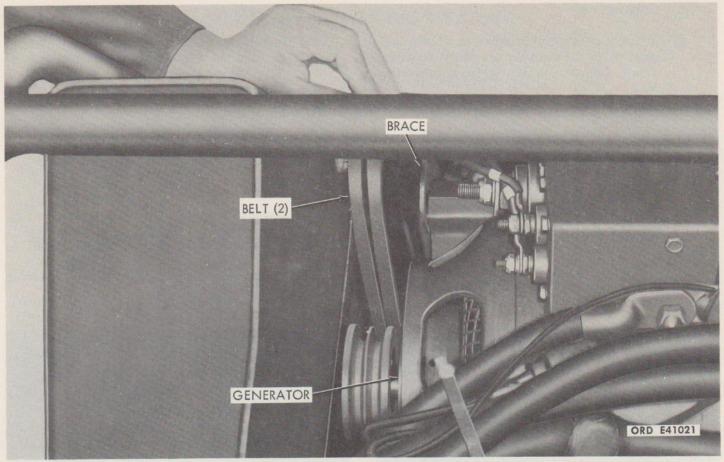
REMOVING OR INSTALLING GENERATOR DRIVE BELTS.
